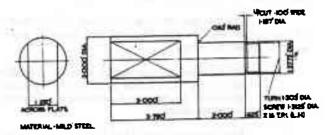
MANDREL - DETAILS FOR MANUFACTURE.
